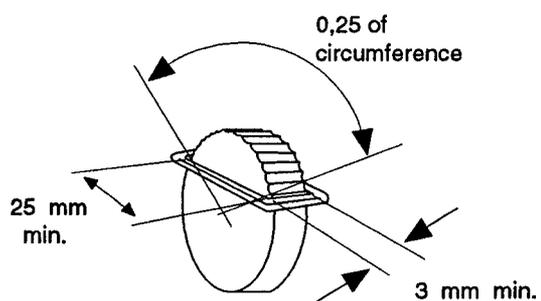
Thumb/finger wheel, preferred minimum dimensions
